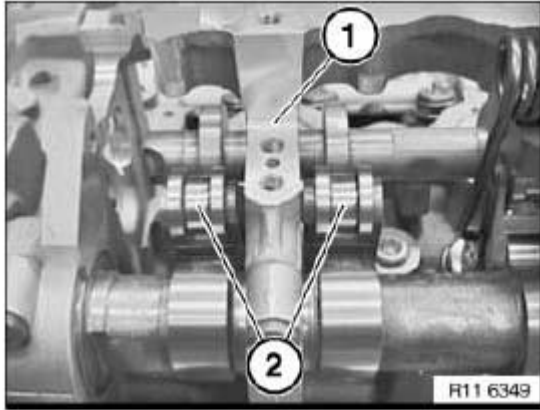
Identifying Intermediate Levers And Contact Surfaces
